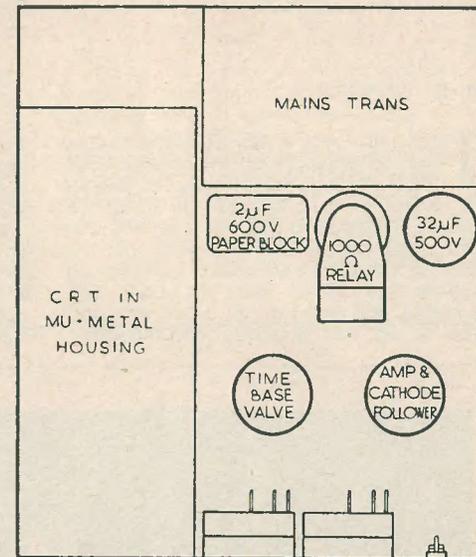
PORTABLE OSCILLOSCOPE - UPPER CHASSIS LAYOUT
